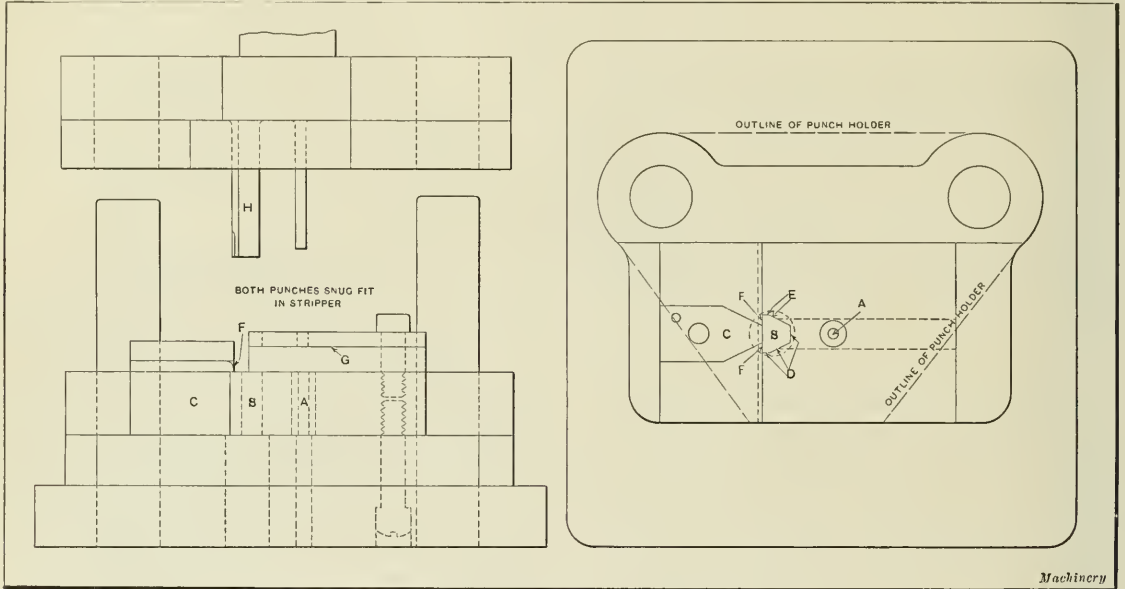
Die for forming Small Steel Piece shown in Fig. 1
